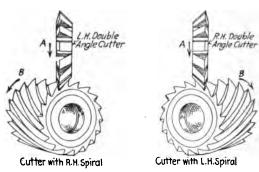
Illustrates the difference in the setting of the table and also in the cutter used when milling right hand and left hand spirals. Both views are shown as from the foot-stock end of the table. Arrow A denotes the direction of the cutter, and arrow B the direction of the rotation of the blank as the spiral groove is being milled.
